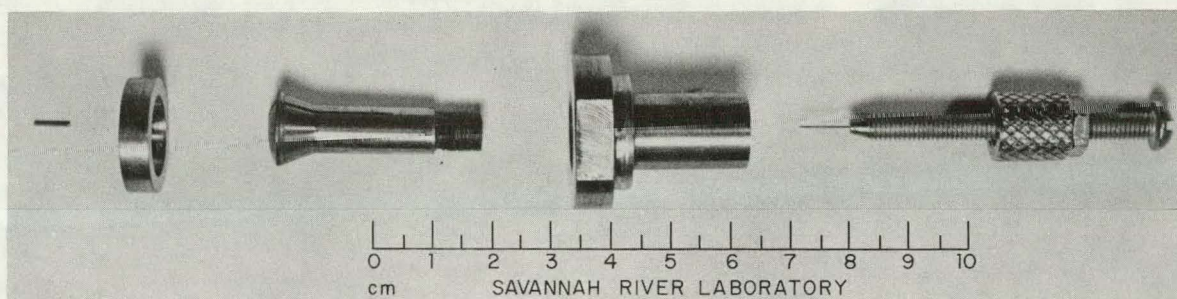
Disassembled View of Collet for Handling ^{252}Cf Seed Capsules
